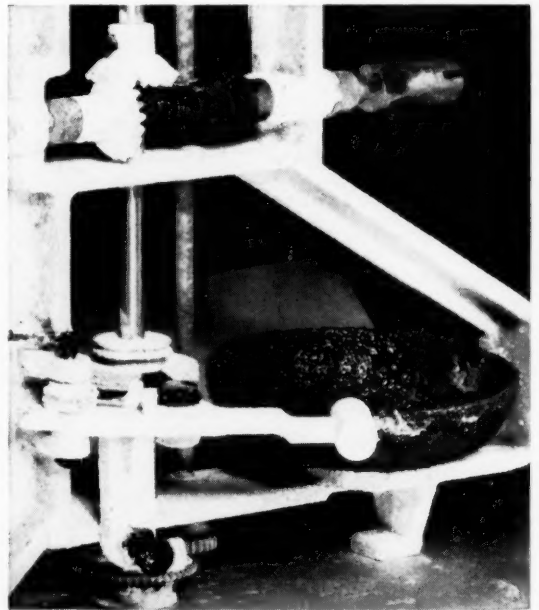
A mechanical assembly received in the Far East rusted beyond use due to the lack of a rust preventive when packaged.
